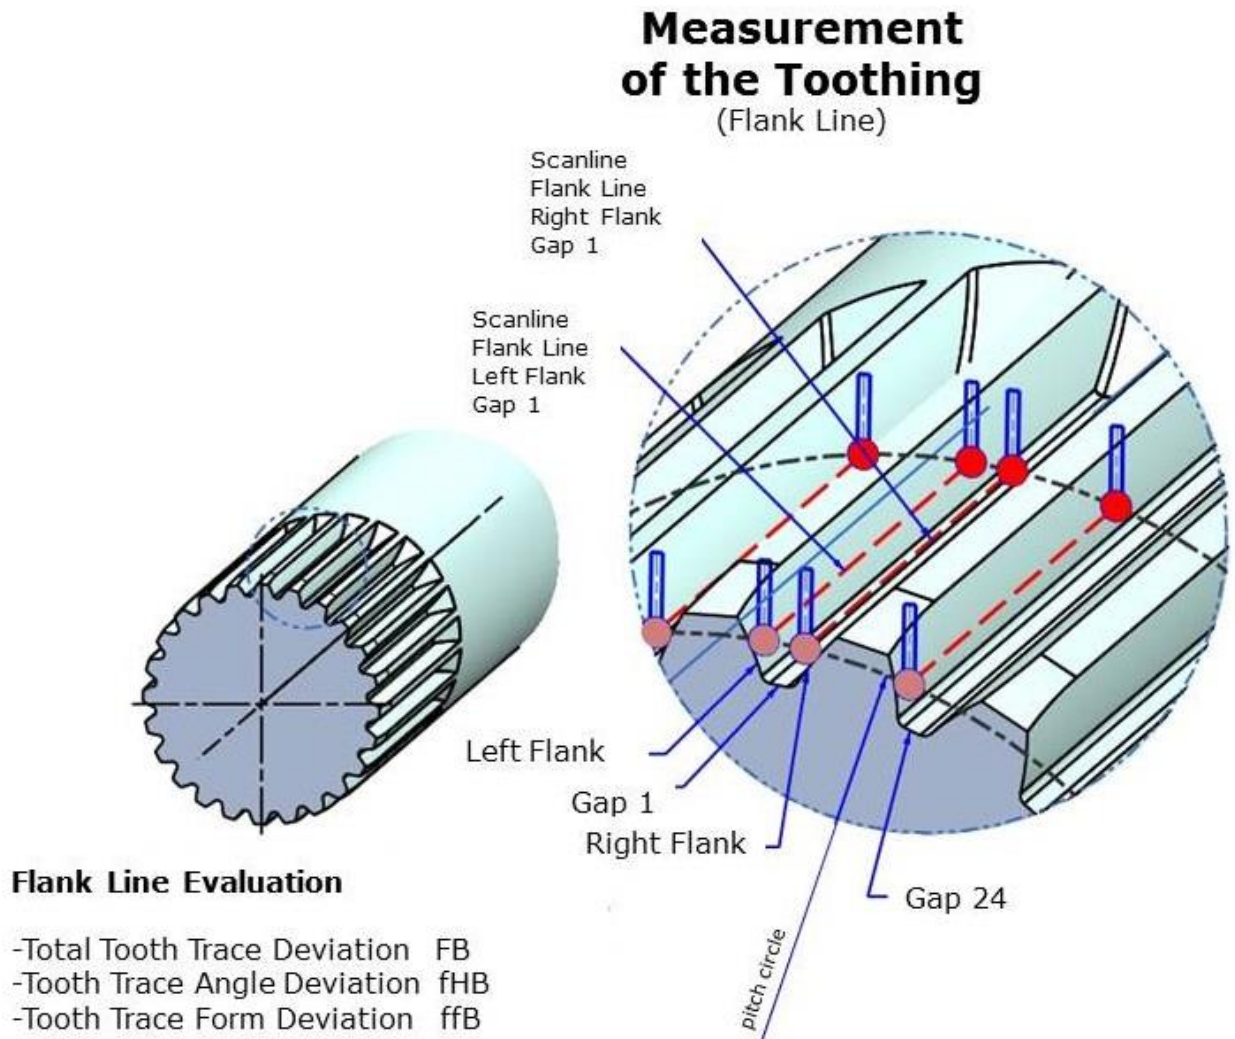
Measurement / Probing / Tooth Direction / Flank Line
